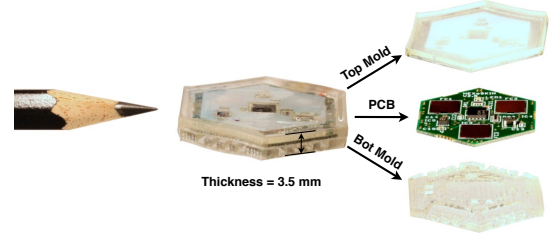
Parts of the unit cell - Top mold, electronics and bottom mold
